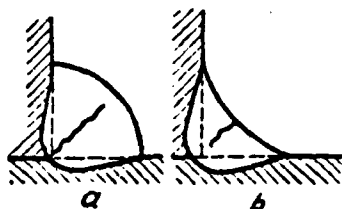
Effect of shape of weld on disposition of hot cracks:
